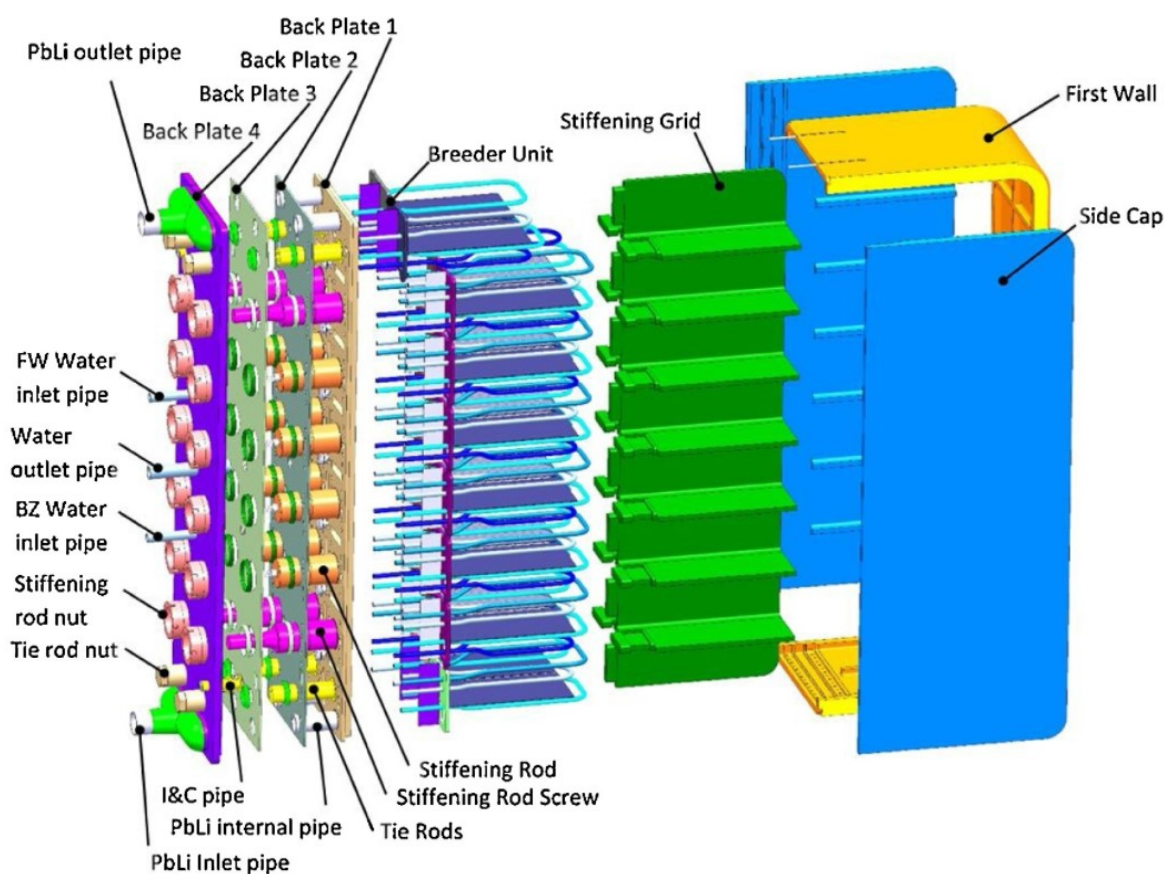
Exploded view of WCLL-TBM box, [88].
